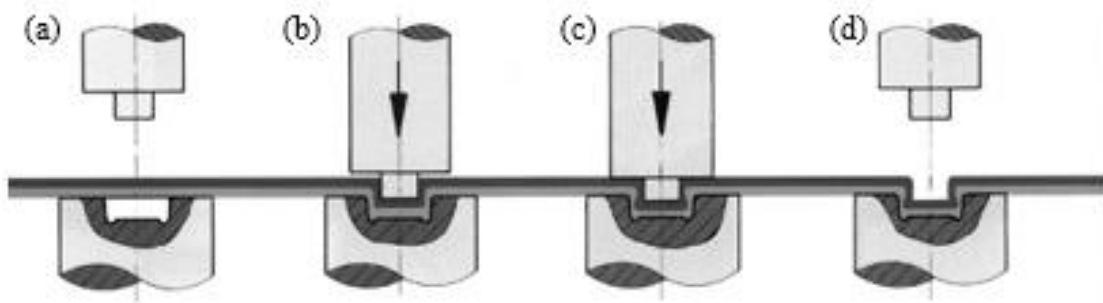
Conventional clinching process: a) Deformation b) Drawing c) Extruding d) Interlock forming [25]
